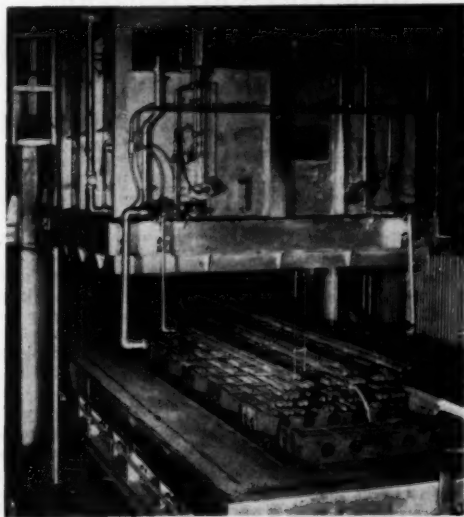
CAR BOTTOM OF NEW CONTROLLED-ATMOSPHERE FURNACE IS SHOWN, WITH A CHARGE OF BARS, MOVING INTO PLACE BENEATH THE FURNACE COVER WHICH IS IN RAISED POSITION
